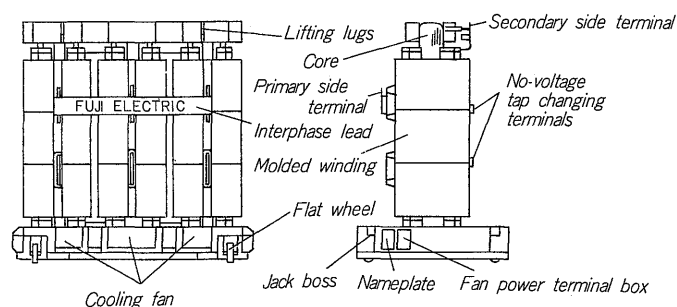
Construction of 3 ϕ 7.5 MVA Fuji molded transformer
